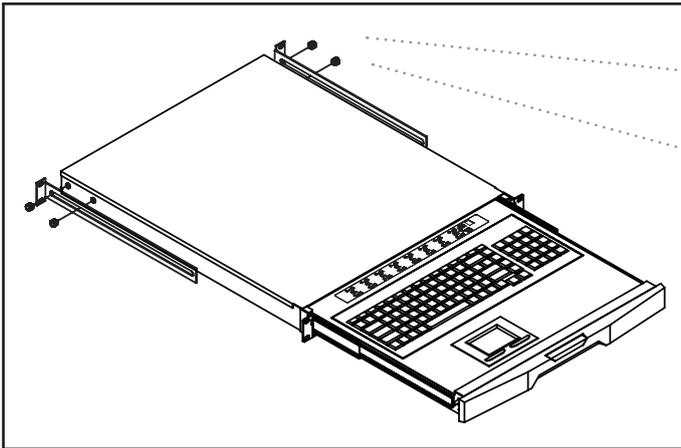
Installing the rear L-bracket to the keyboard drawer.
